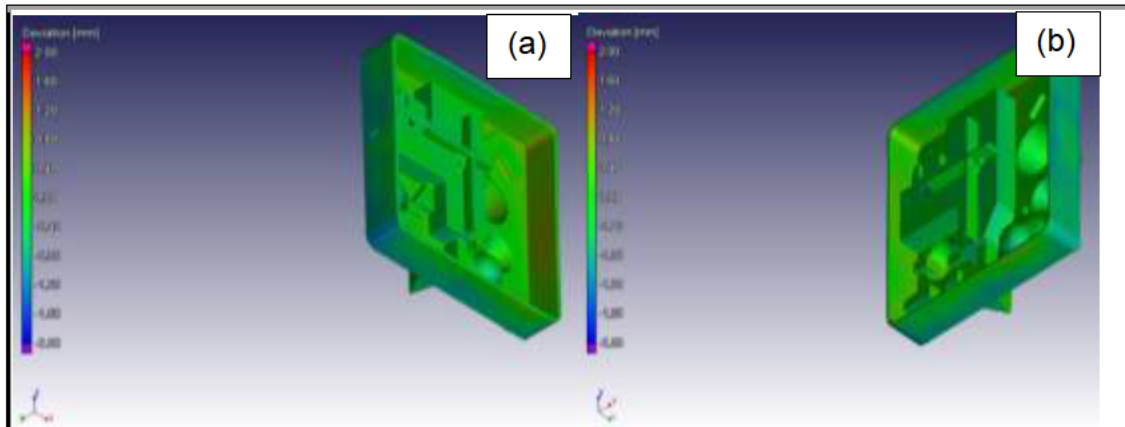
3D images: (a) bottom-left-front and (b) bottom-front-right
